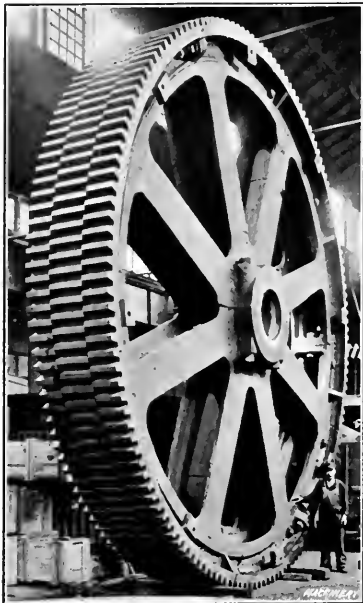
Large Gear built by the Mesta Machine Co.—Diameter, 22 feet 8 inches; Circular Pitch, 5½ inches; Face Width, 38 inches
